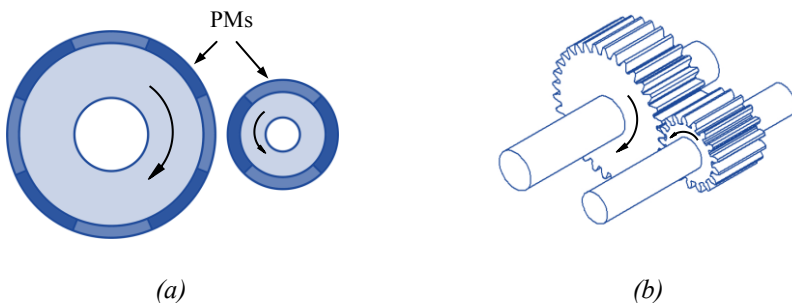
The spur gears, (a) magnetic spur gear, (b) mechanical counterpart.
